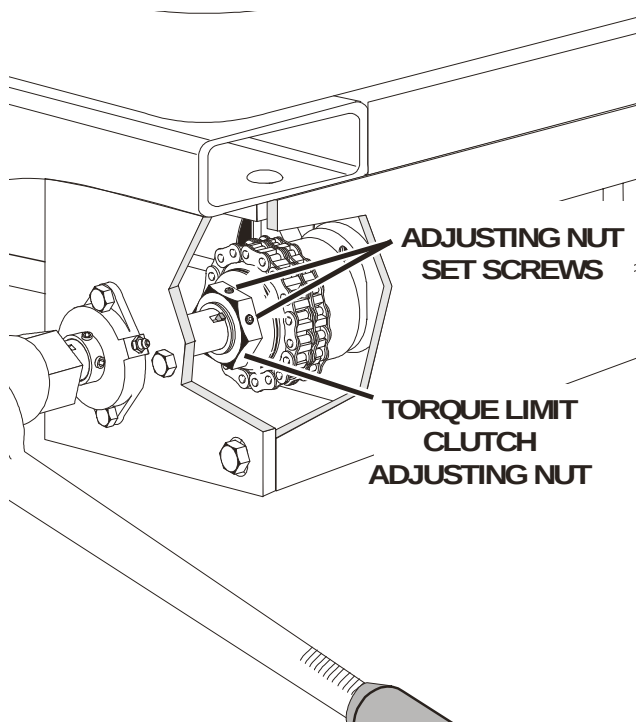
Torque Limit Clutch - Adjustment Components.
